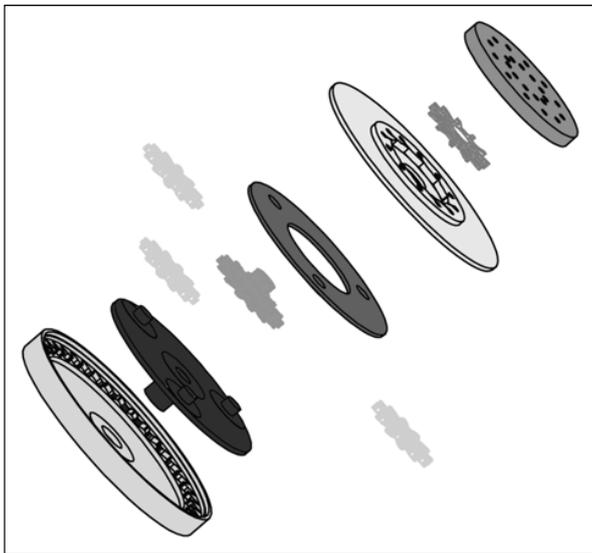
CRC499 Demonstrator: compressed air driven turbine and one stage planetary gear train assembly.
